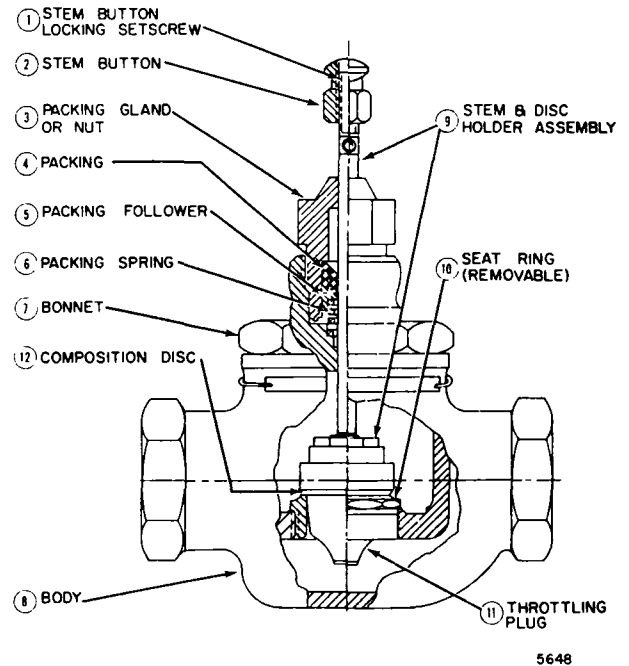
Cutaway of Typical V5011A Screwed Type Body
